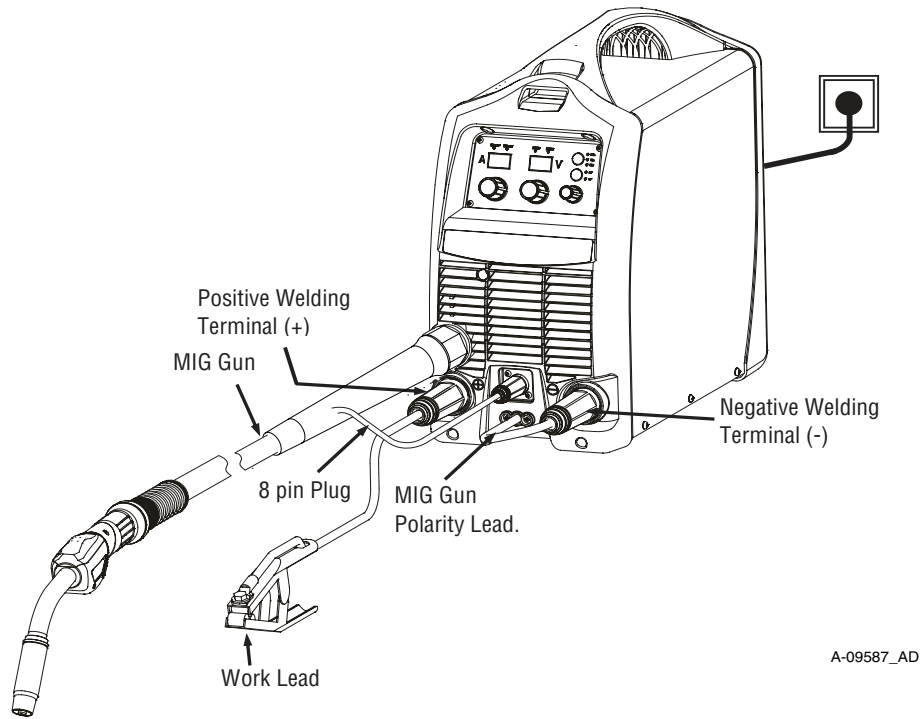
Setup for MIG (FCAW) Welding with Flux Cored (Gasless) Wire
